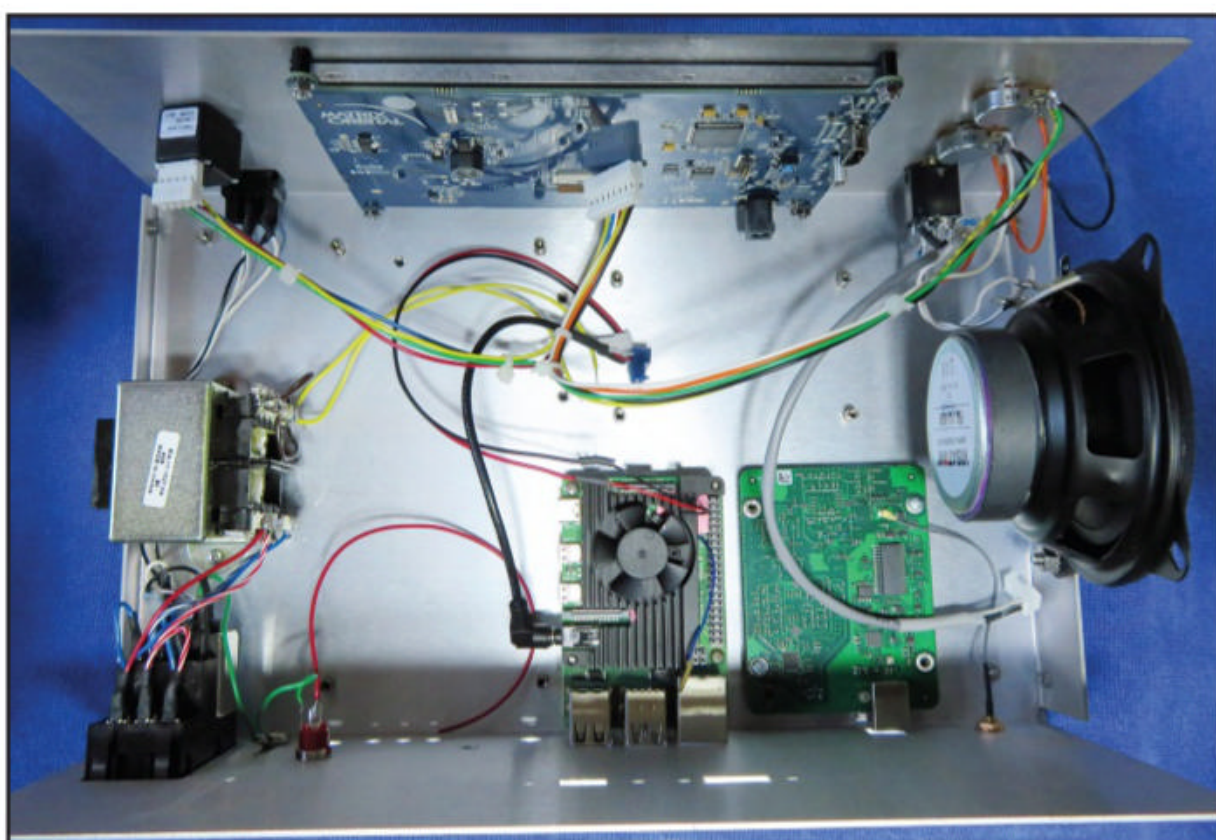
Photo K. The chassis part of the assembly is completed and awaiting the main controller board.
